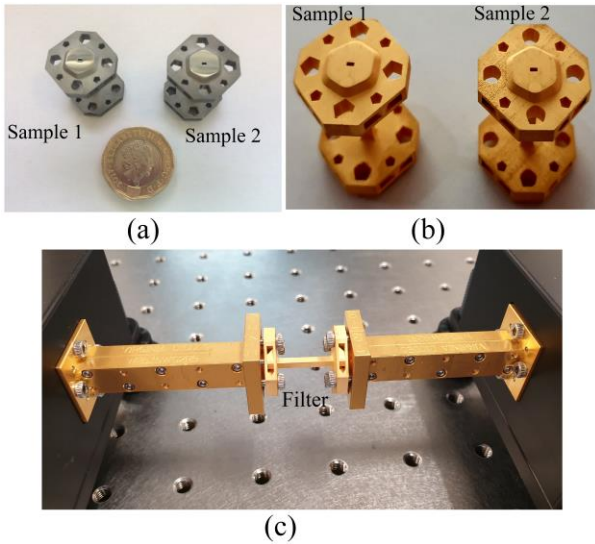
Photographs of the prototypes: (a) as-printed stainless steel samples; (b) gold-coated samples and (c) measurement setup of the filter.
